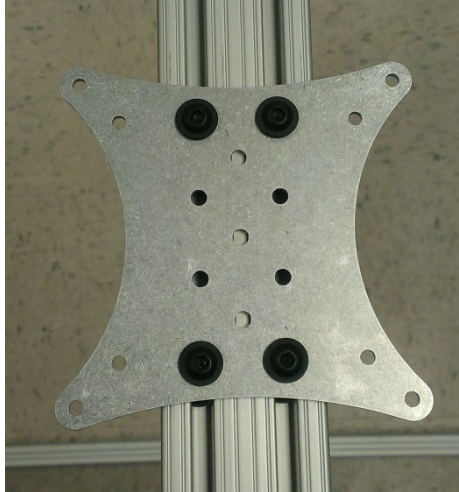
Mounting plate as attached to 80/20™ extrusion
